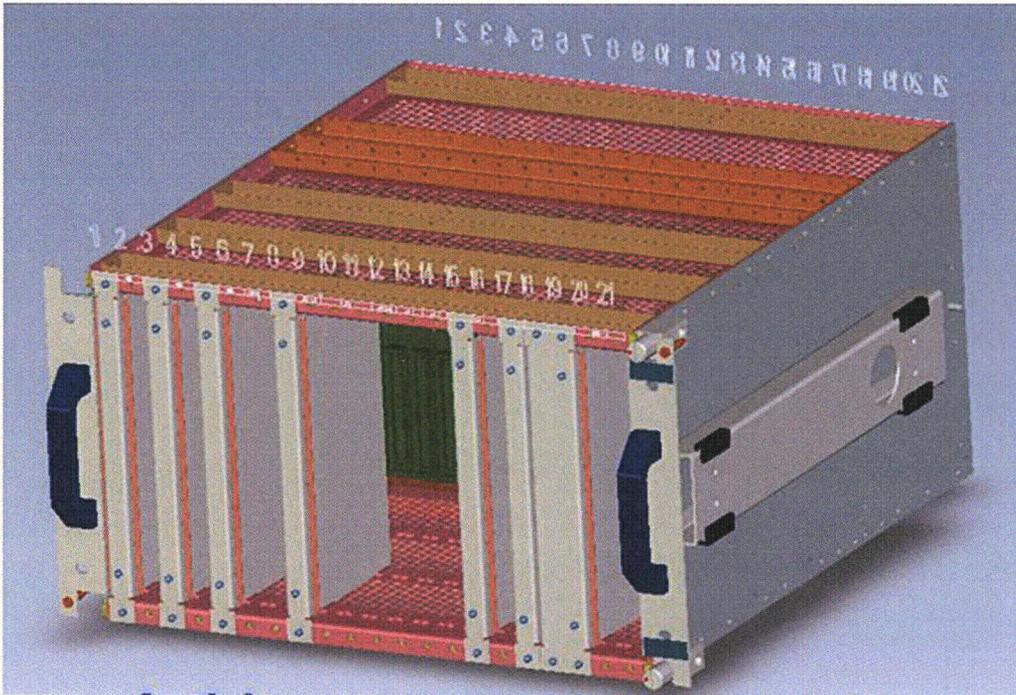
SPINLINE 3* Chassis - Front View
